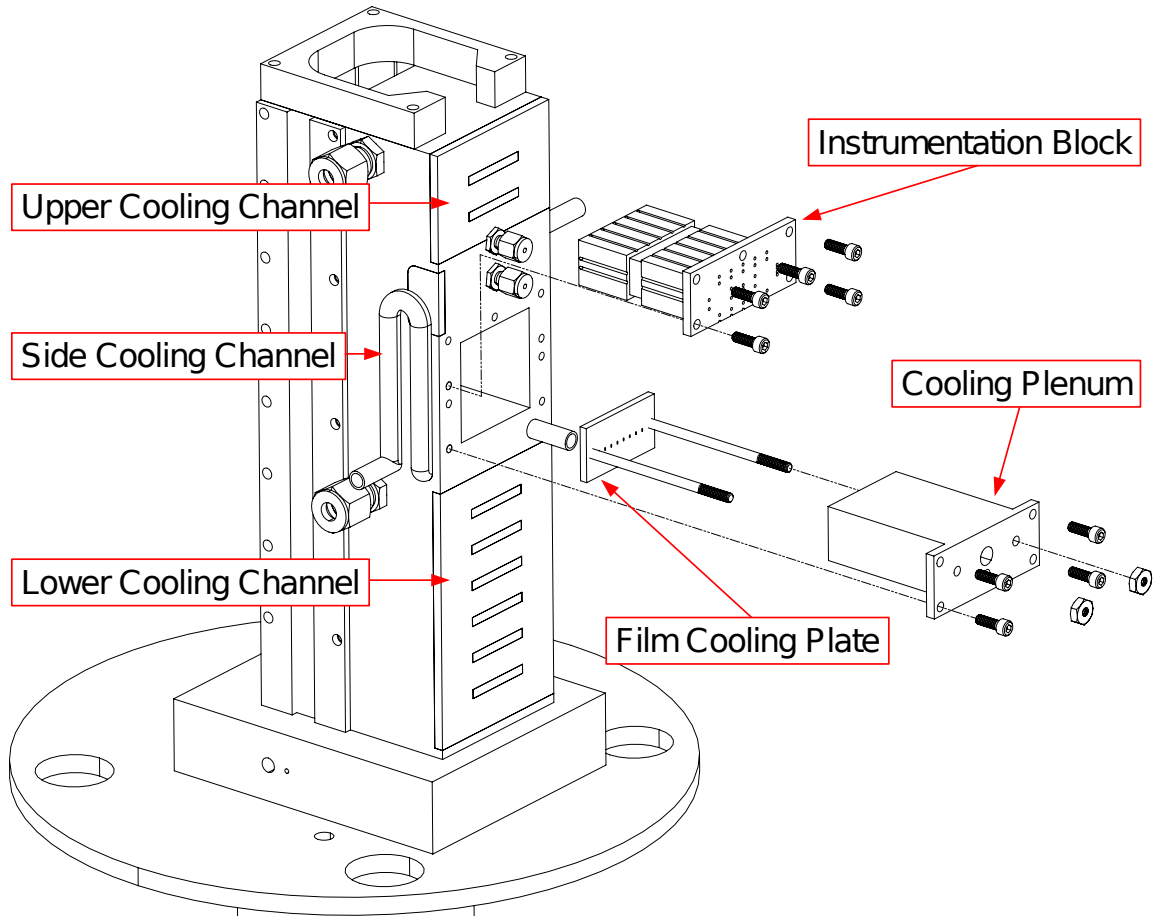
Drawing of rig cooling channels and test insert assembly with hardware
